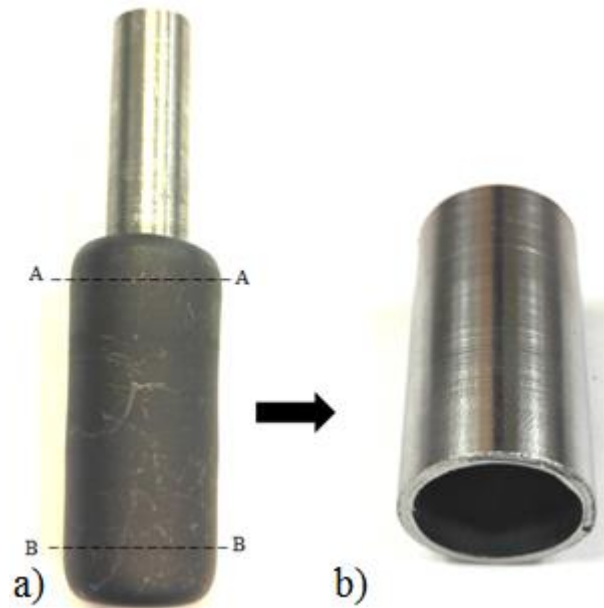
F2T tube a) Tubular product as produced by F2T process. b) The resulting tube, upon machining of both ends.
